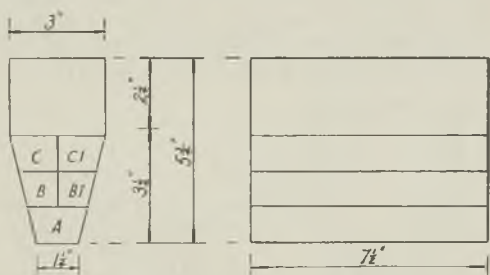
SHOWING REVISED METHOD OF SECTIONING TEST-BLOCK.
